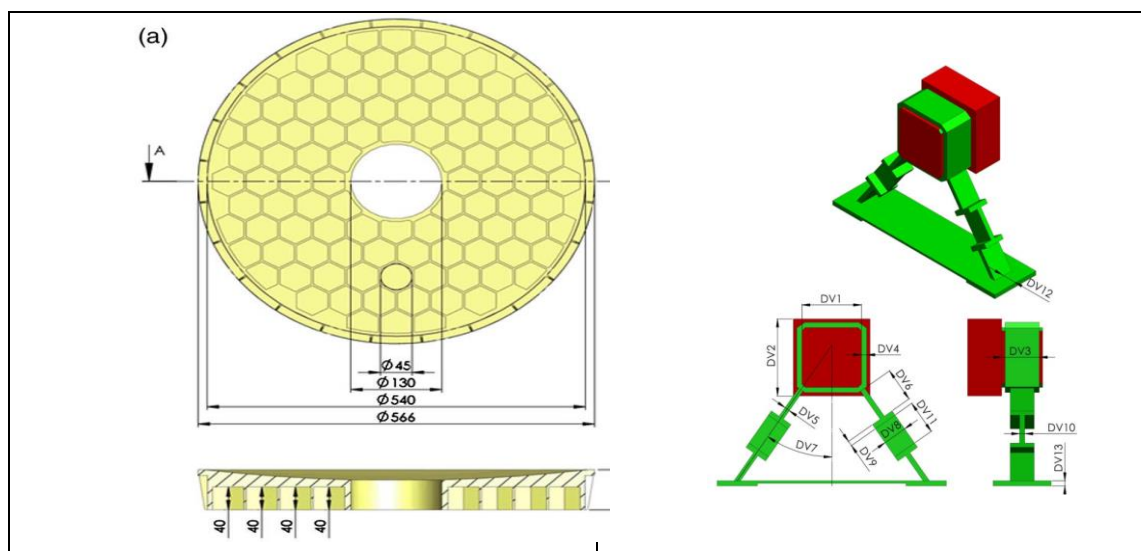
Assembly Design Concept for a 566mm diameter Primary Mirror [6]
